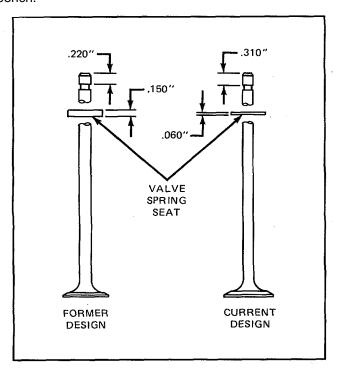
Former and Current Design Exhaust Valves (Four-Valve Head)
